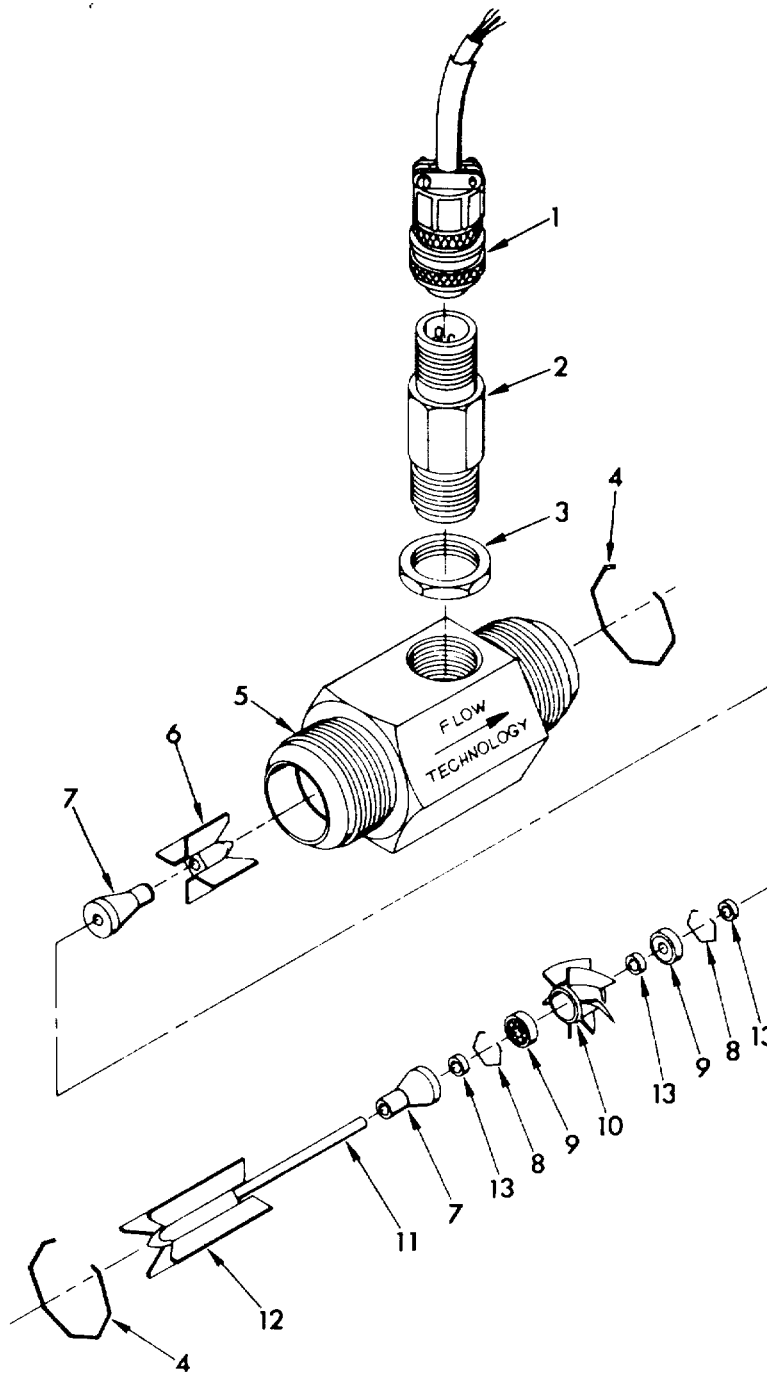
COMPLETE DISASSEMBLY 1" FLOW TRANSDUCER.
